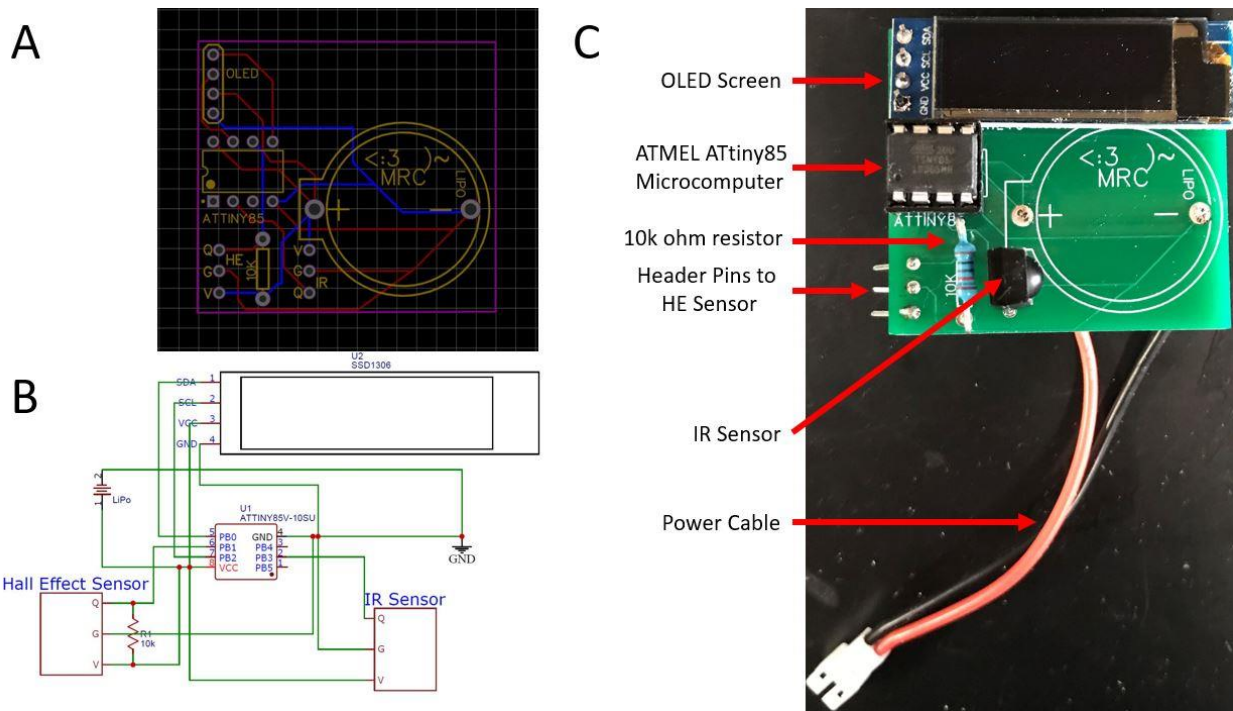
Mouse running wheel PCB schematics and parts layout. (A) Mouse wheel PCB diagram. (B) Electronic schematic. (C) Fully-constructed PCB with parts labelled.
